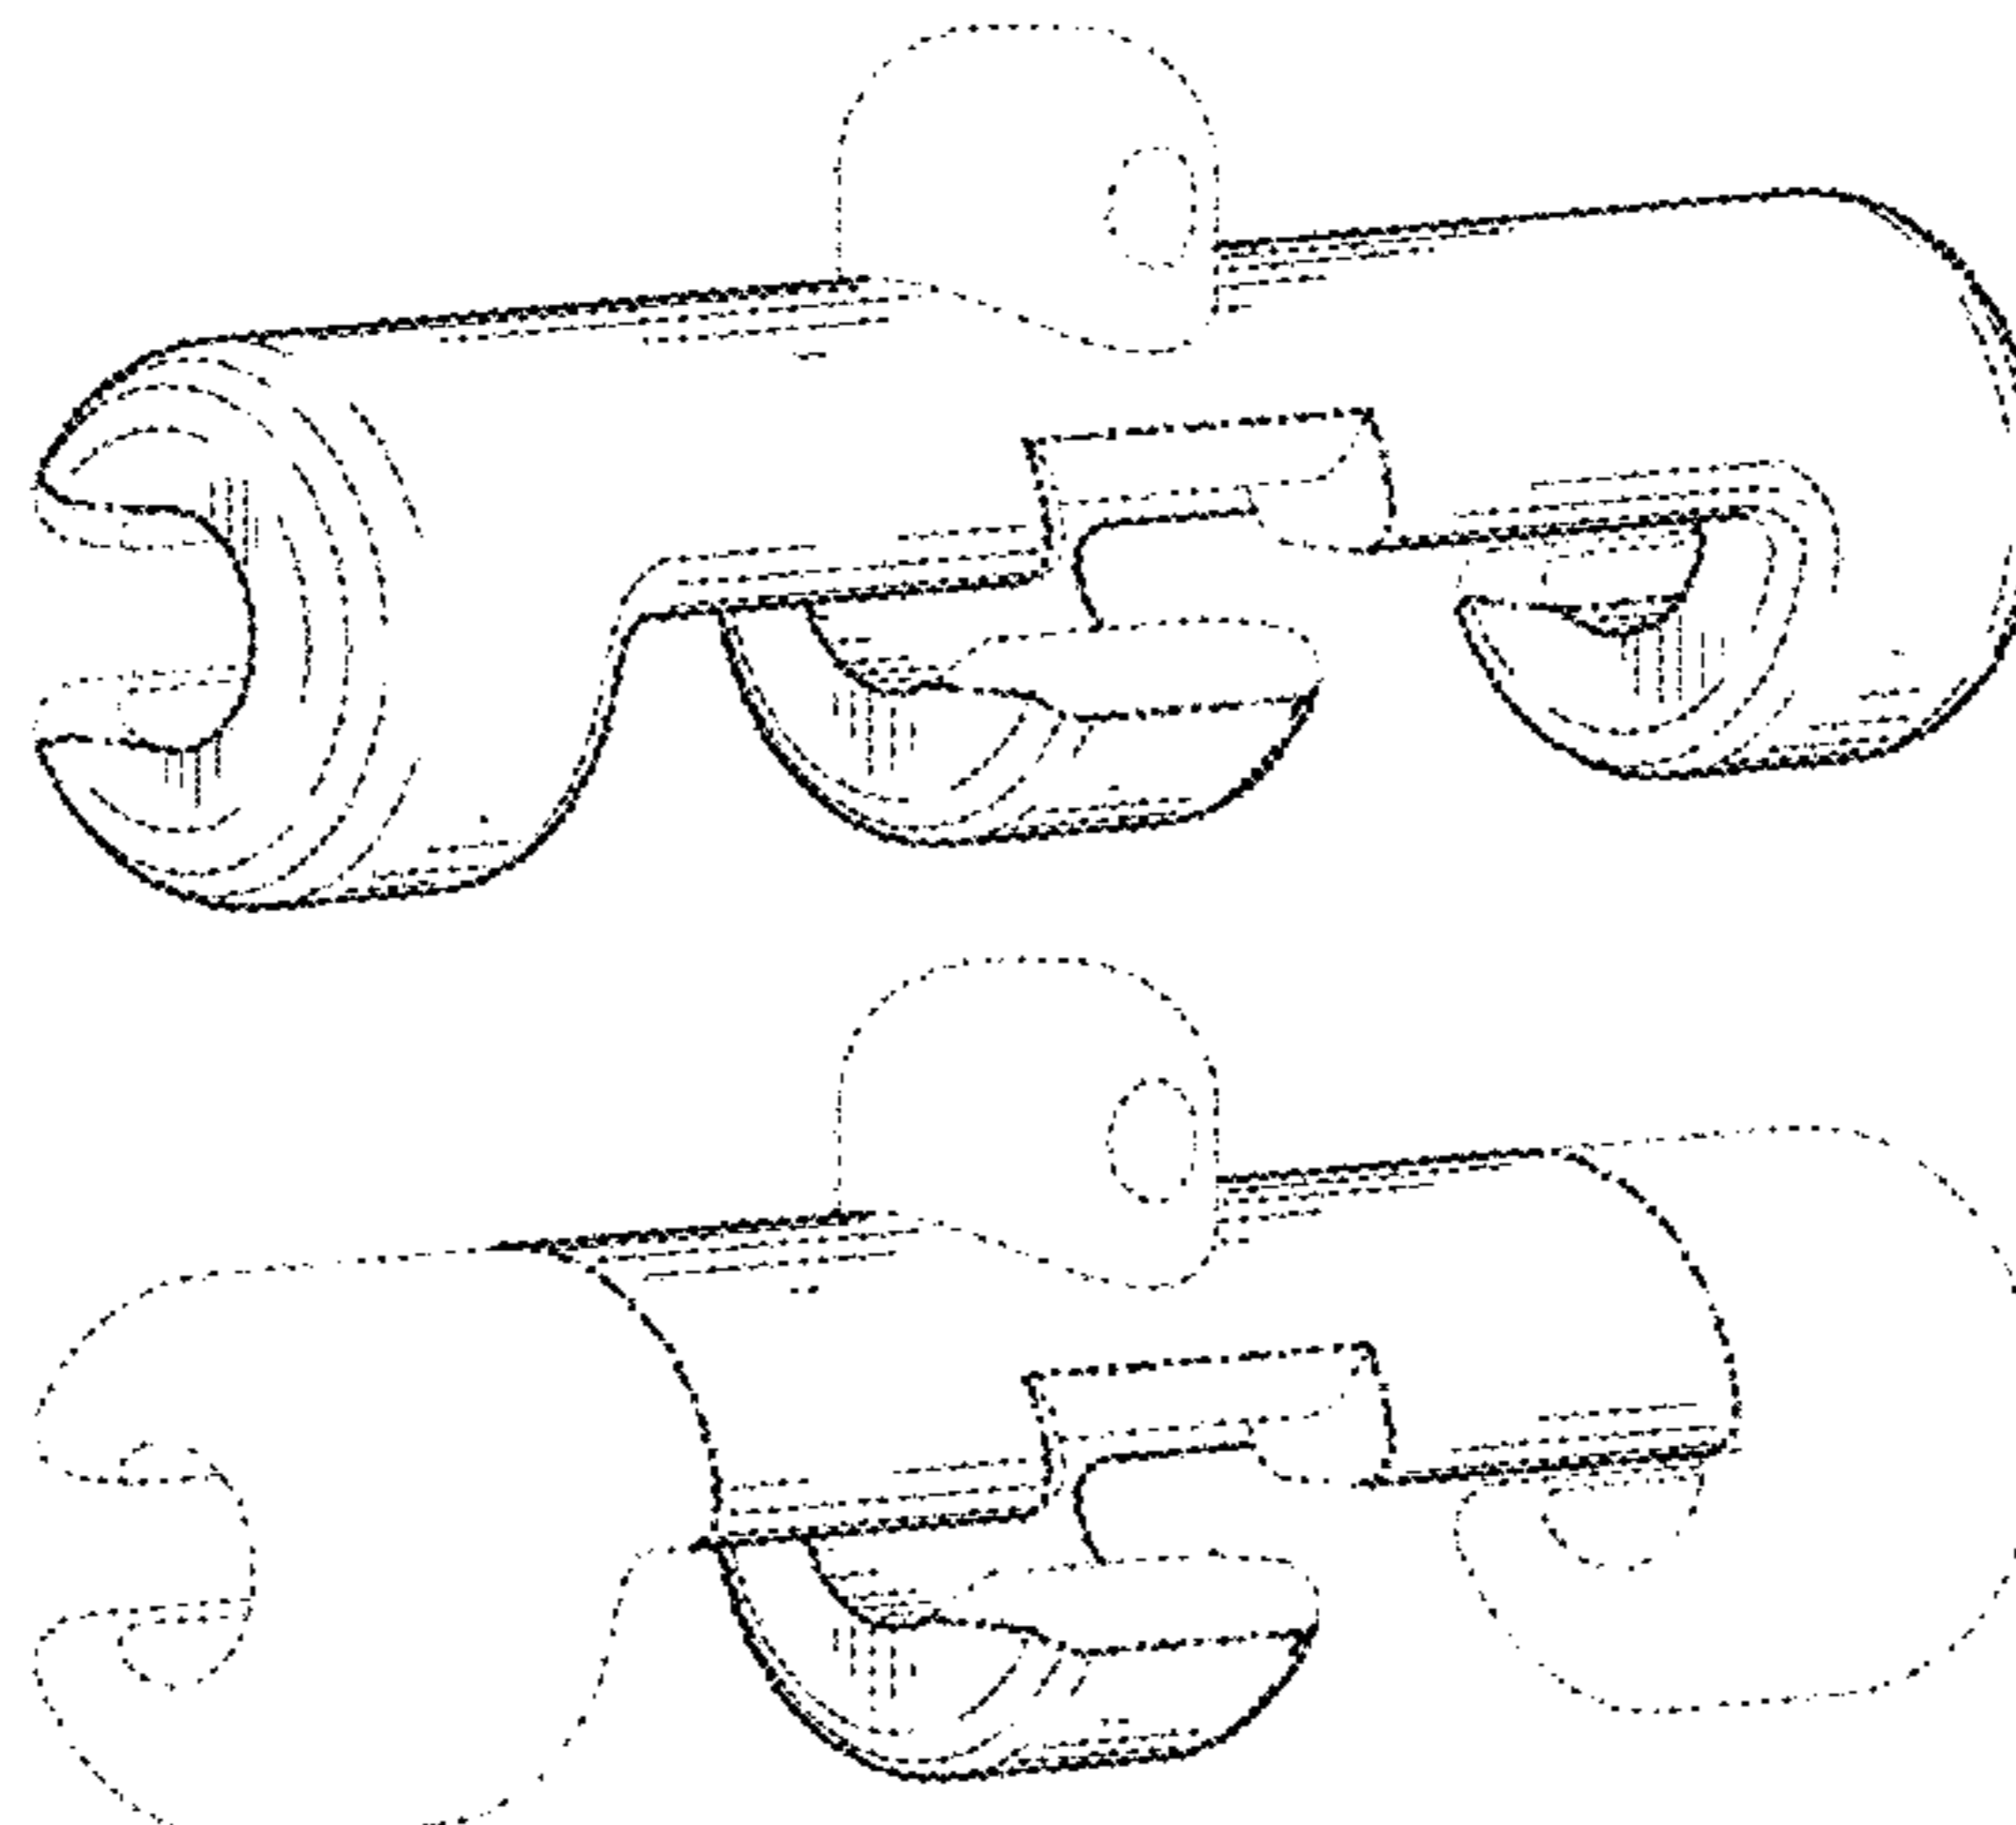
is a bottom perspective view of the IV-tube cradle thereof;
